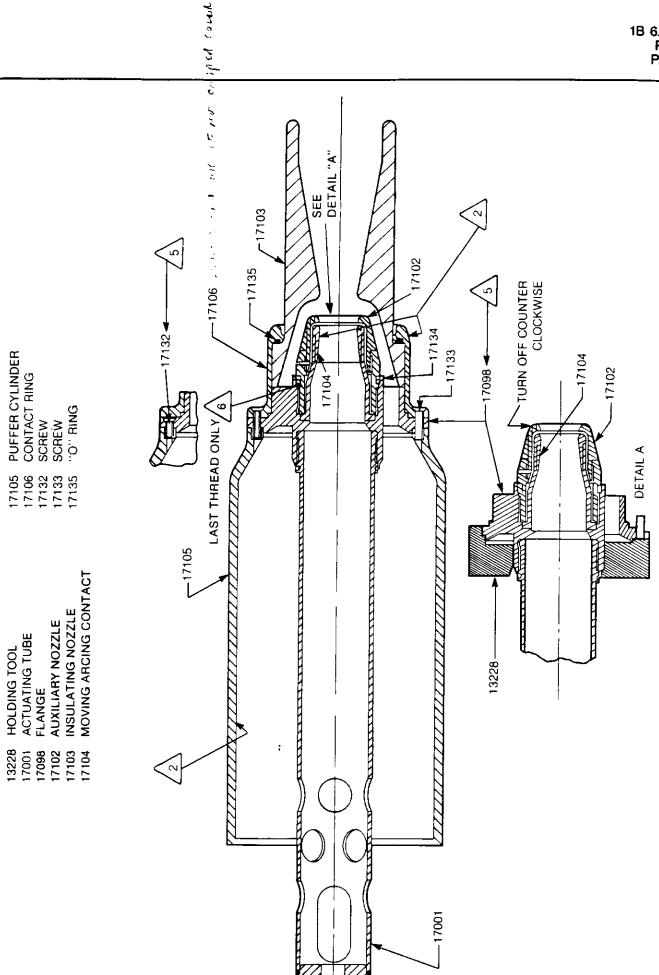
17099 PUFFER PISTON ASSEMBLY
